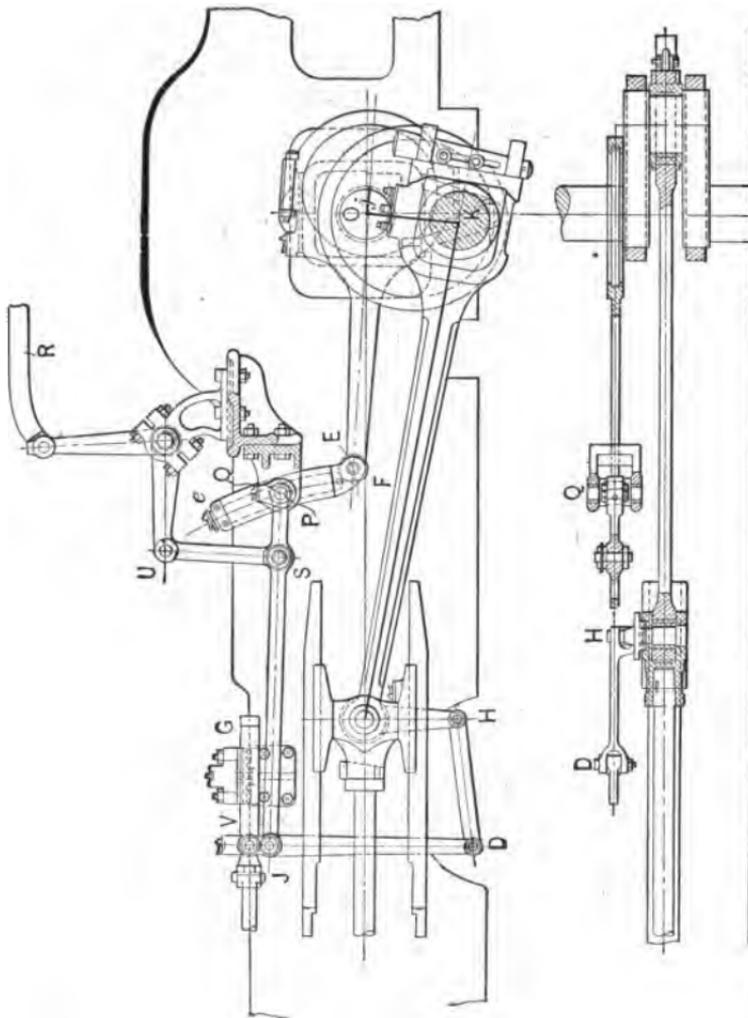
Walschaert Valve Gear for Low-Pressure Cylinders of the DeGlehn Compound.
